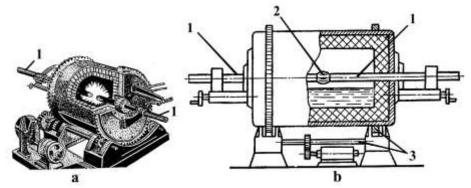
Electric arc furnace of indirect heating a – drawing; b - scheme: 1 - electrode; 2 - electric arc; 3 - tilting mechanism
